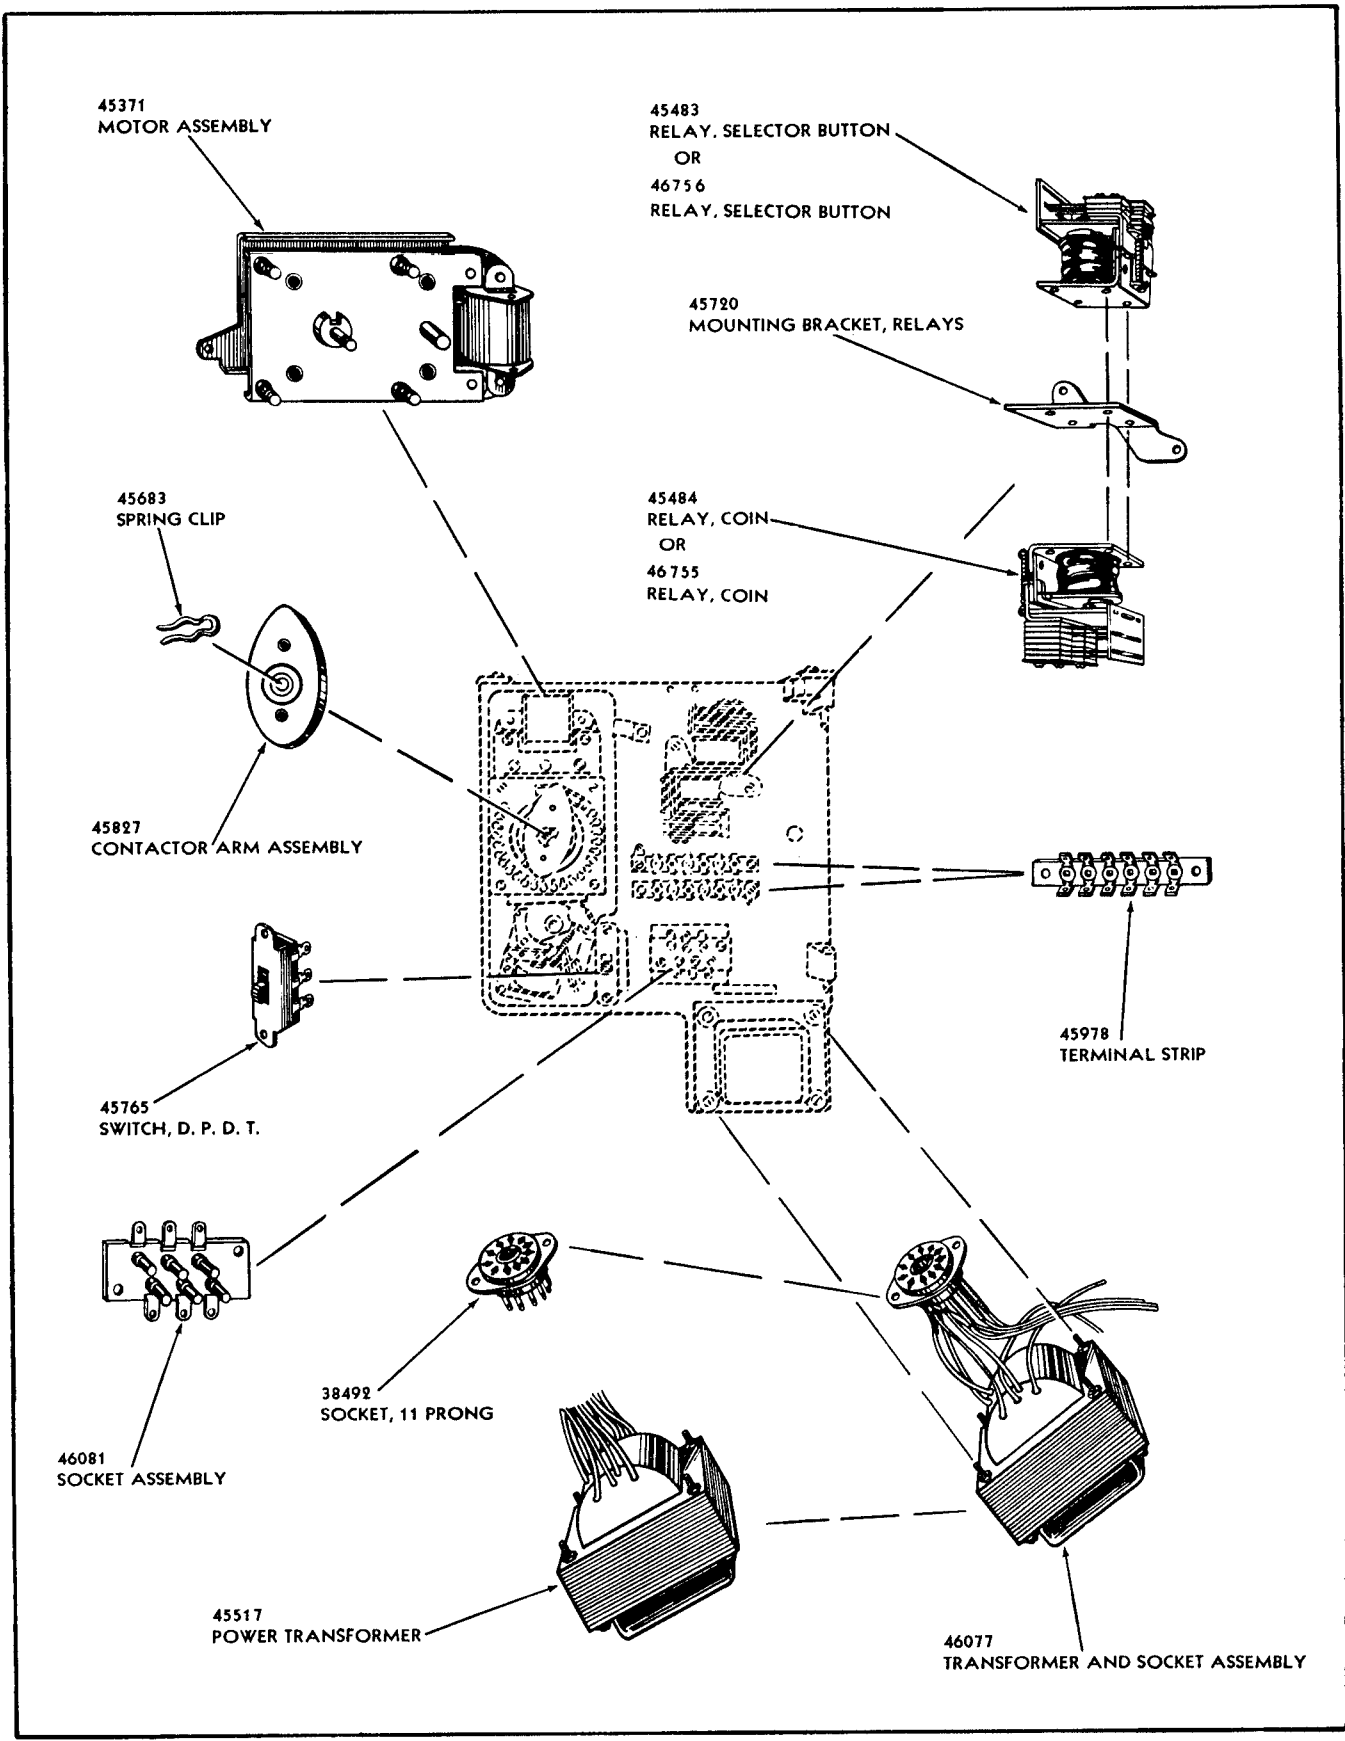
Wallbox Inner Door, Rear Sub-Assemblies
